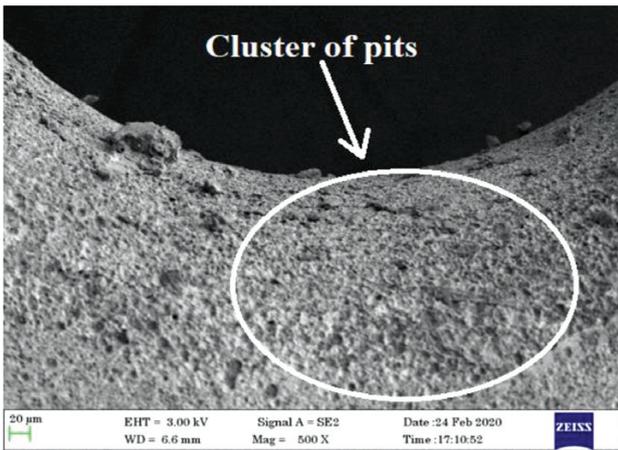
Micro-hole surface with cluster of corrosion/pitting
